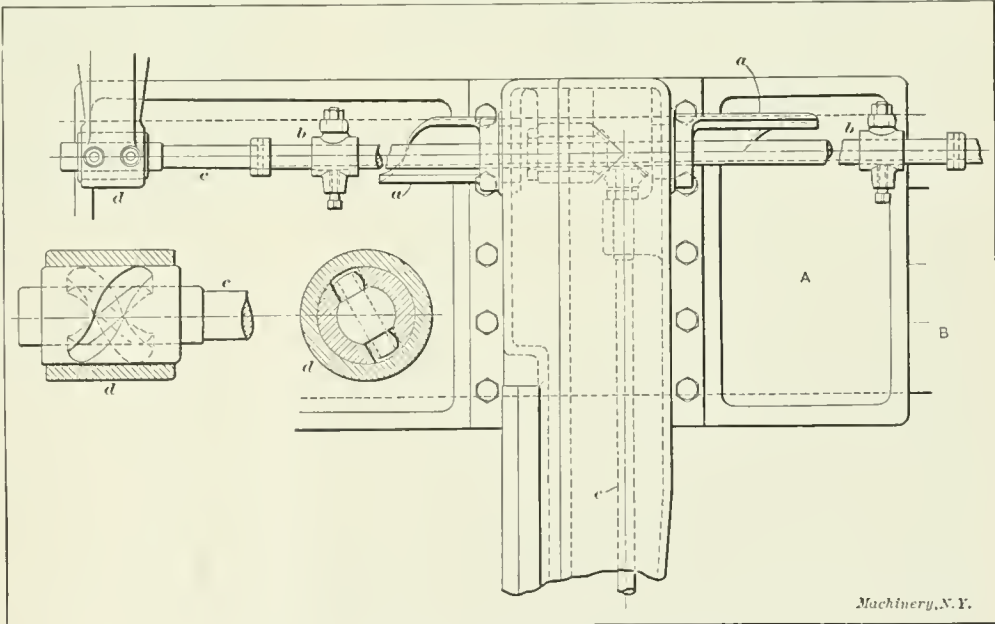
Combined Reversing and Feeding Mechanism for Side Planer
